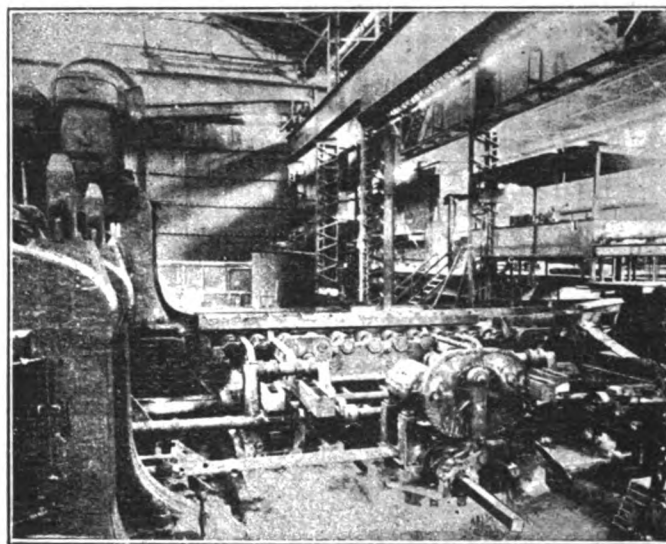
View of blooming mill with electrically-operated manipulator fingers and side guards.
